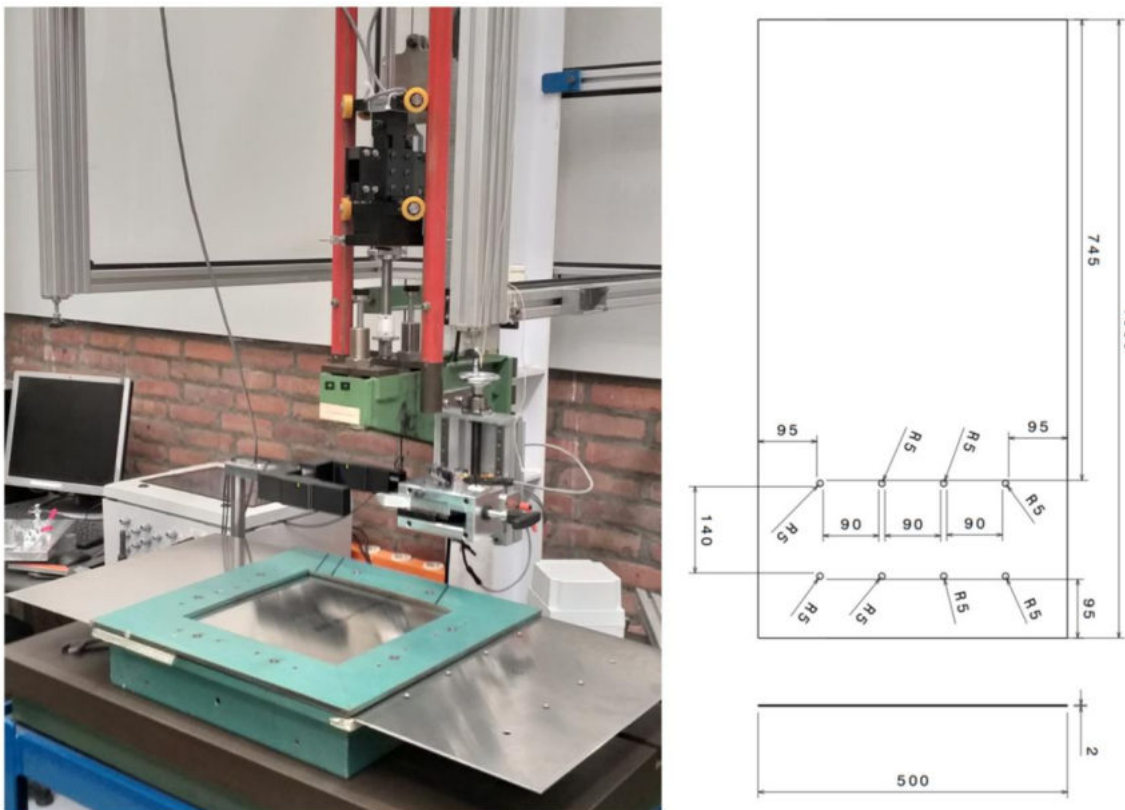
a). Impact test setup and b). Dimension of the specimen in mm (including the rivet holes)
